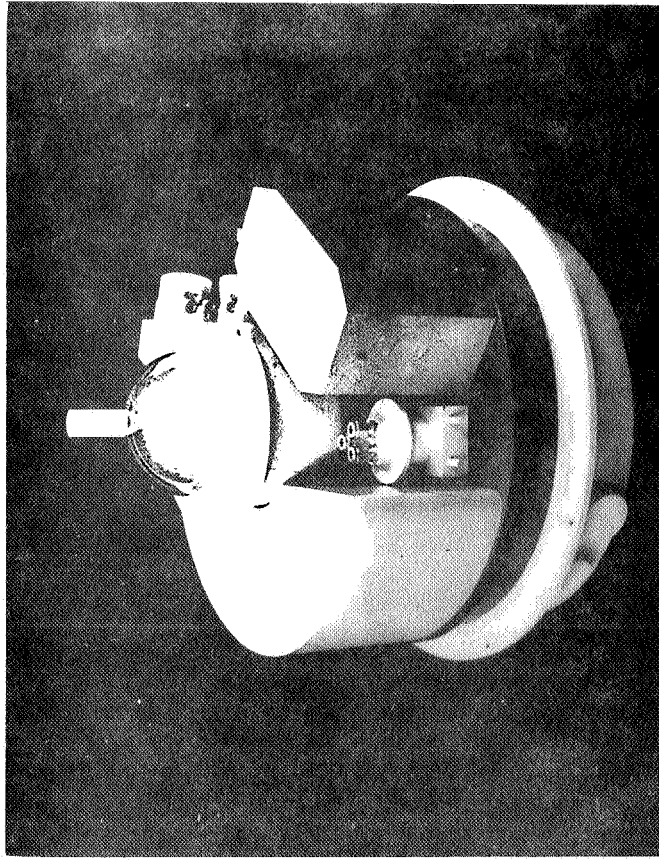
MECHANICAL ASSEMBLY FULL SCALE MOCKUP
